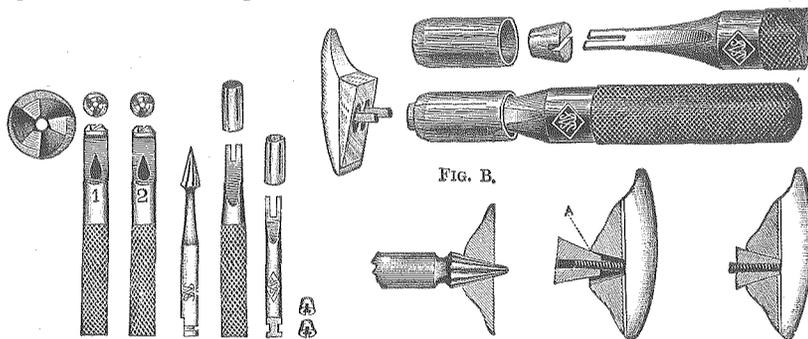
The Bryant Repair Outfit, Showing Taps, Reamer, Screwdriver, Nuts, Etc.
